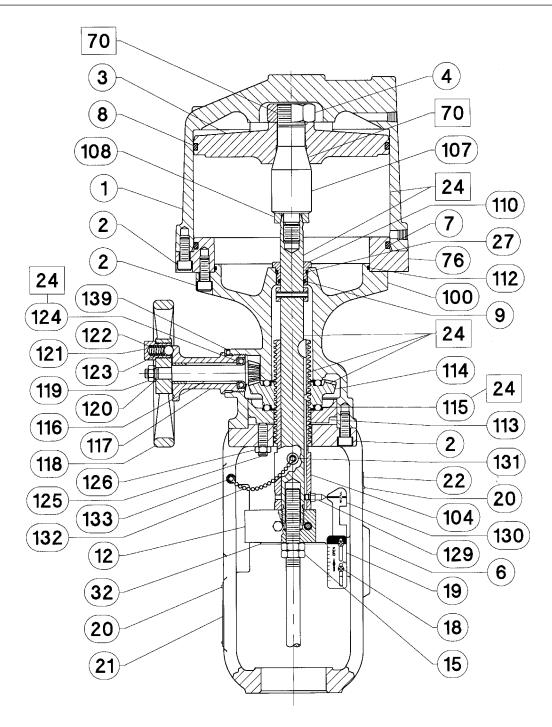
Fisher 585C Size 25 and 50 Actuators Handwheel Assembly—Direct Acting, Push Only (spring retracts actuator rod)
